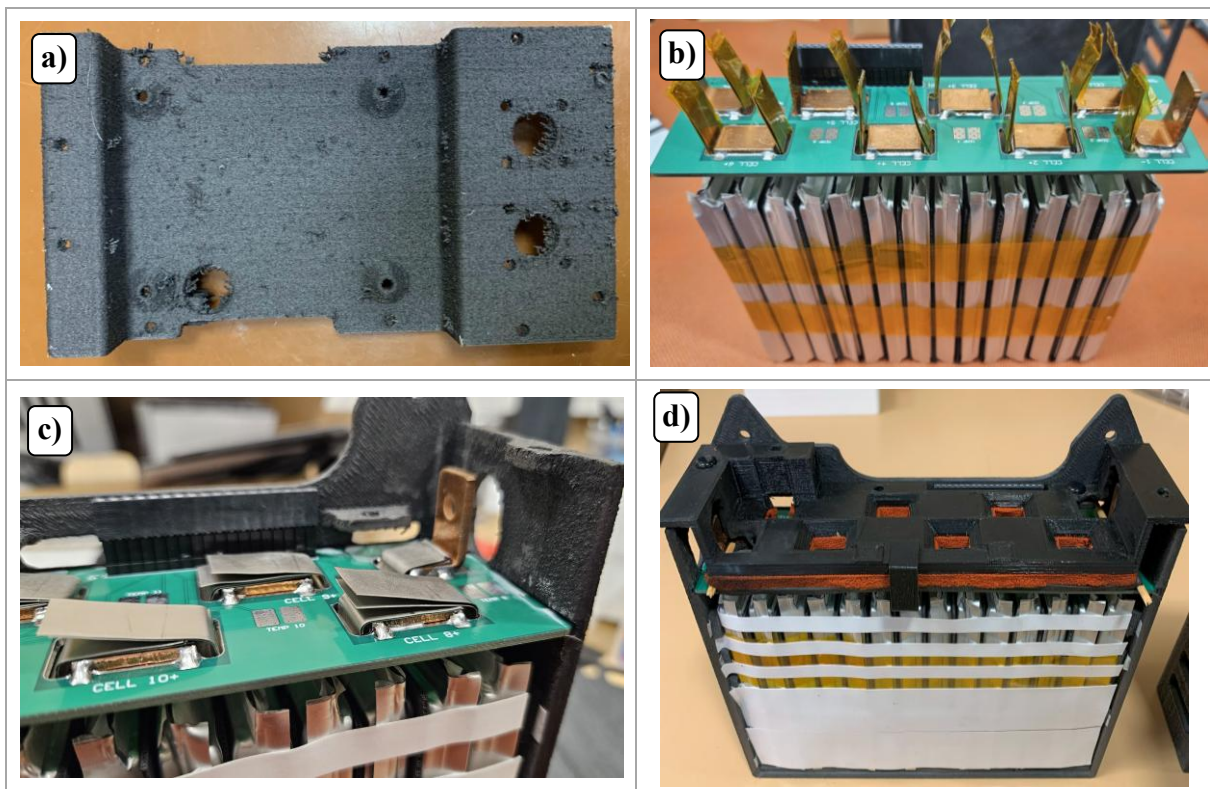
Module assembly details – a) printing quality example, b) cell stack with PCB, c) cell contacts ready for welding, d) half-module with welding fixture, ready for welding
